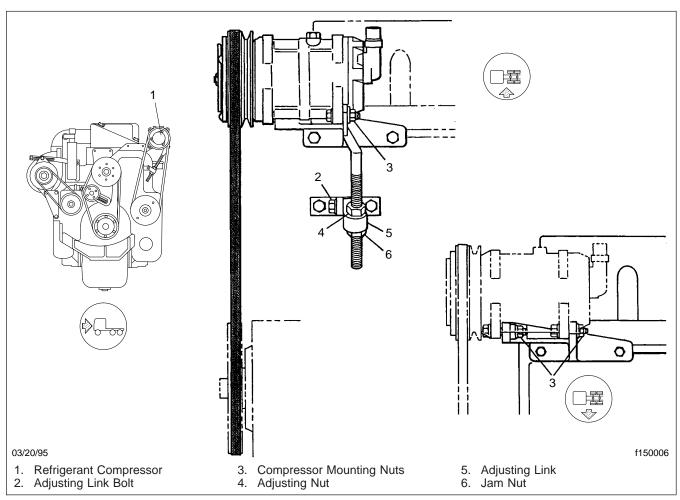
, Refrigerant Compressor Installation, Rotary Type
